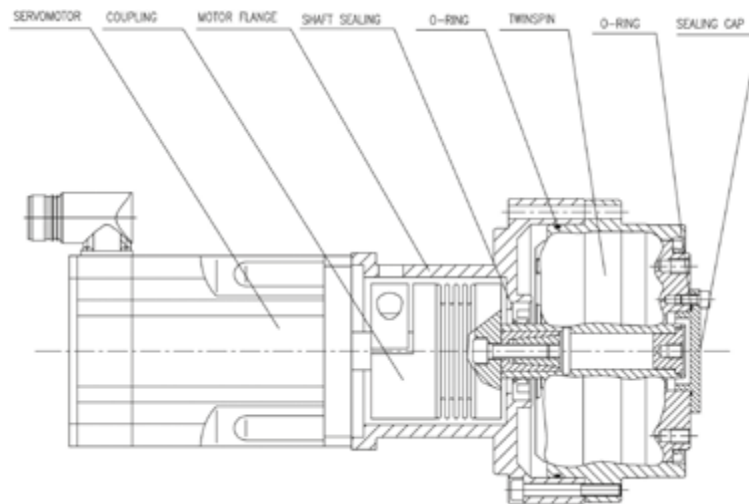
Connection of the motor with the reduction gear with a flexible coupling
